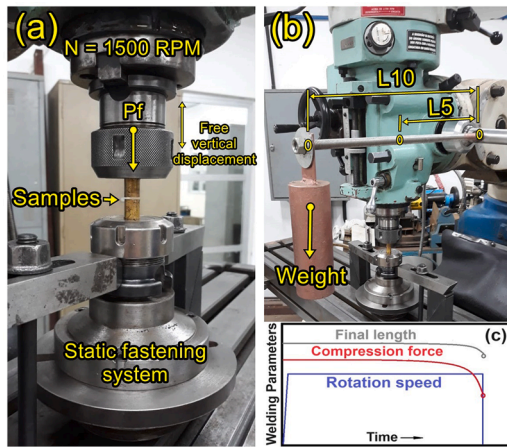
Samples fixed on the motor shaft and static support (a), lever system to obtain the desired friction pressure (b), and behavior of welding parameters over time (c).
